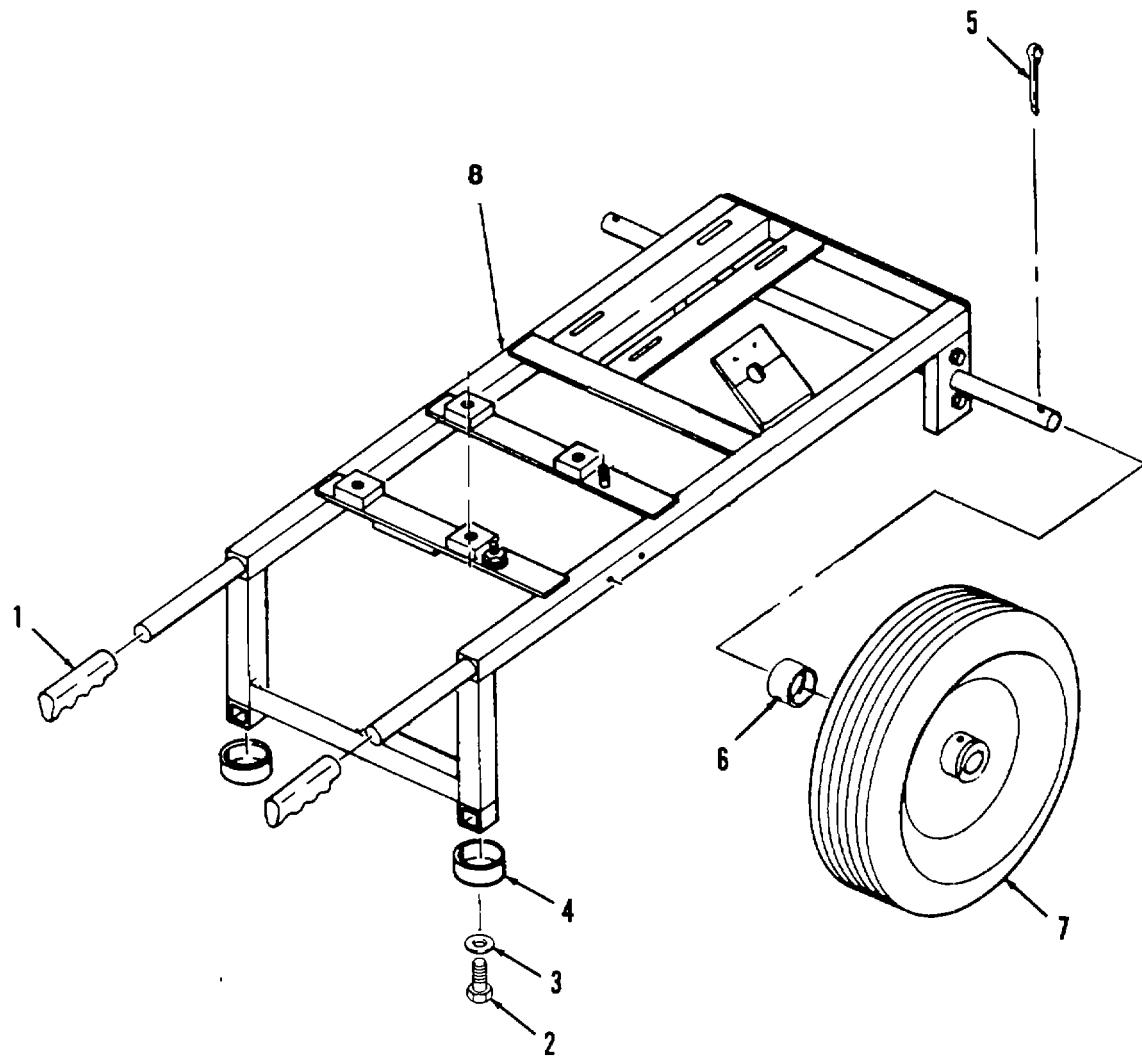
Handle Grips, Tire and Wheel Assemblies, and Chassis
